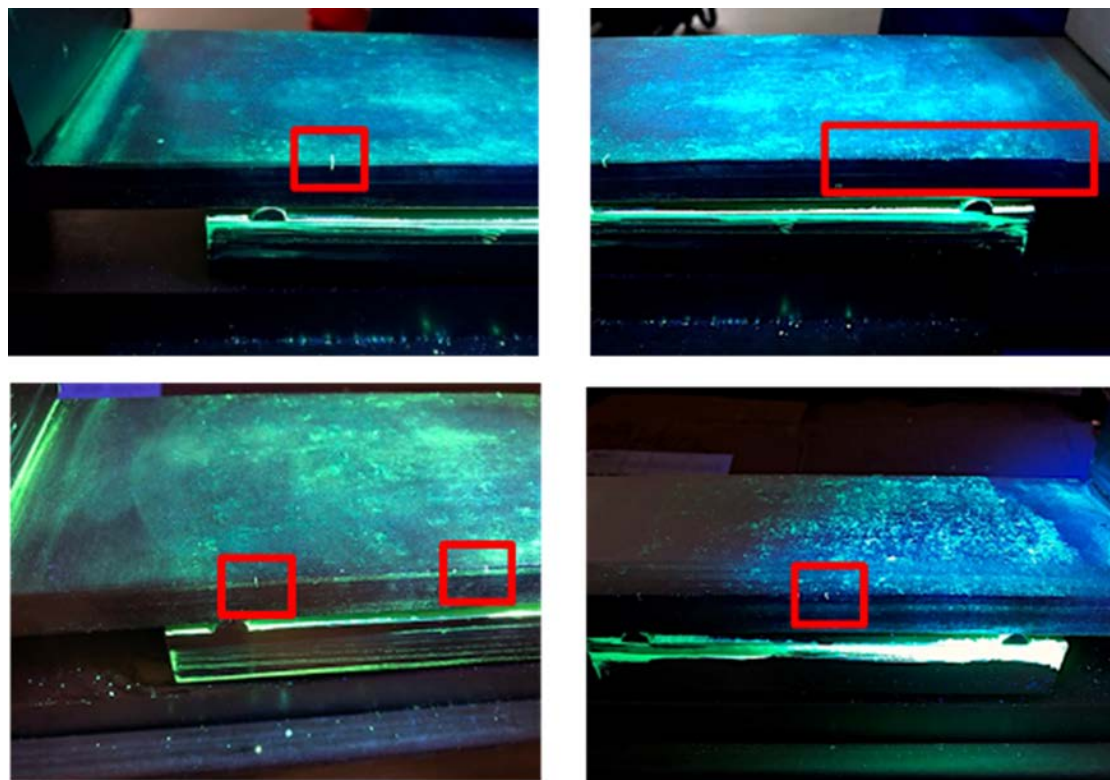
Dye penetrant analysis revealed small cracks on the edges of the 4-point bend specimen after testing at 80°C and 35 % RH.
